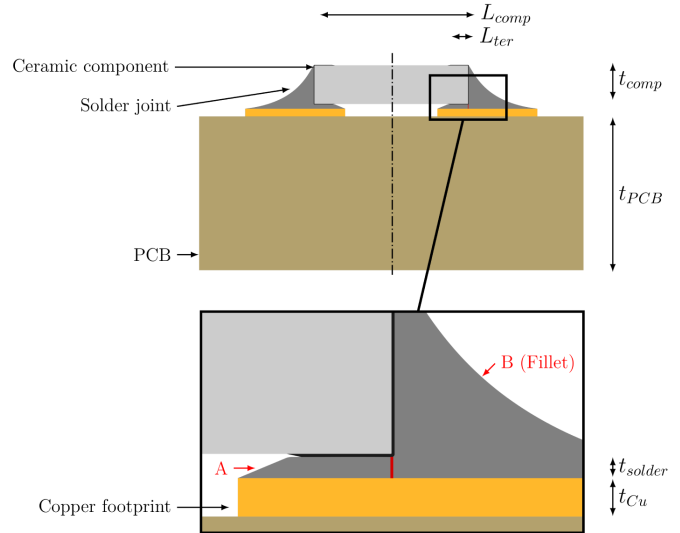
End-capped chip component assembly geometric configuration, showing constitutive elements, lengths, and both solder joint regions A and B, underneath the component and the fillet, respectively.
